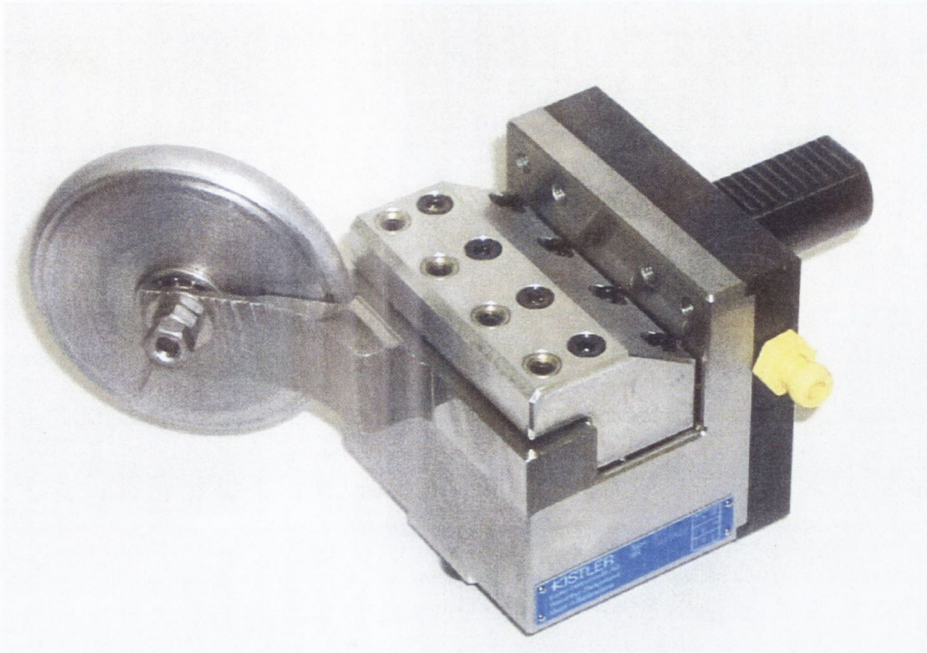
Roller Tool Mounted in the Kistler 9121 Dynamometer
